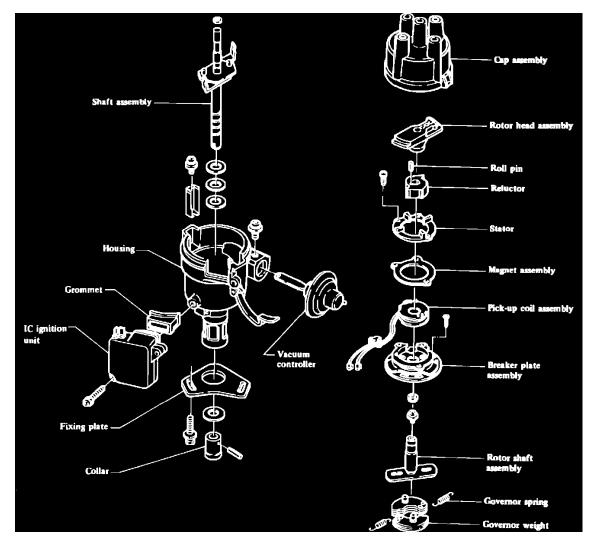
Exploded view of IC type distributor with external IC unit (typical)
